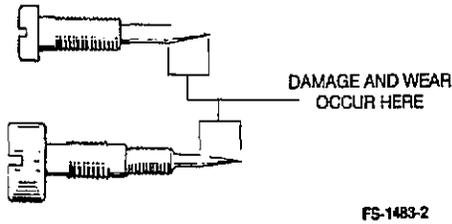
MIXTURE NEEDLE INSPECTION
